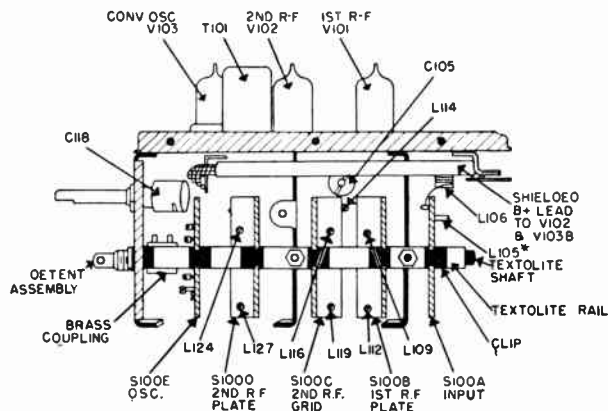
Side view sketch of a tuner using a channel-selector switch. The schematic of this tuner is shown in Fig. 6
